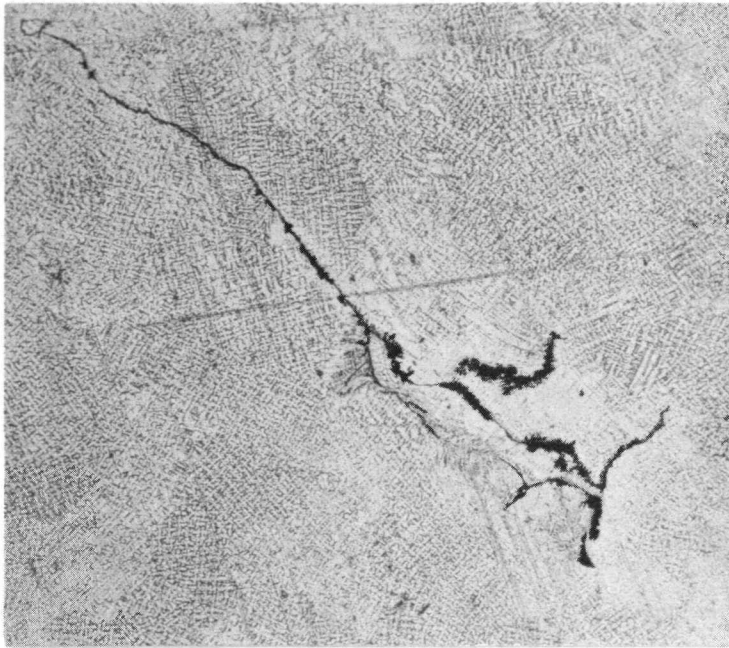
TIG WELD DEFECT IN RENÉ 41 SPECIMEN 2; MAGN 128X
